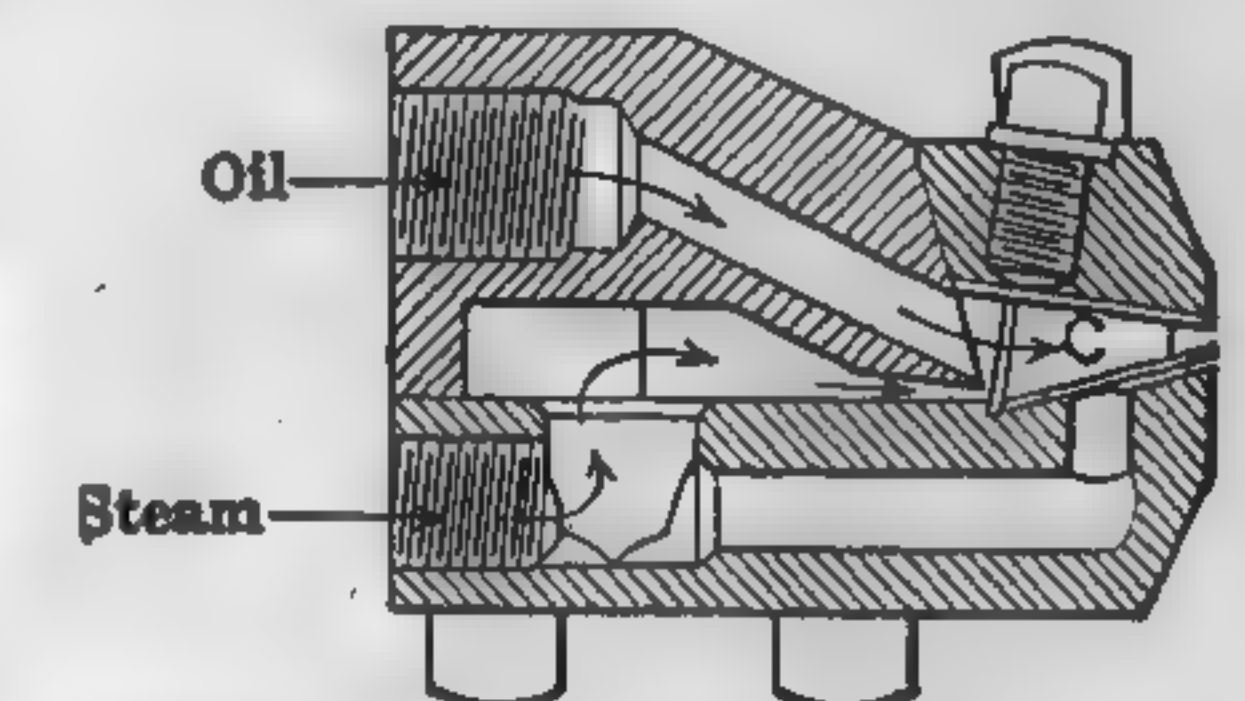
Hammel Oil Burner Head (Steam Atomizer).
